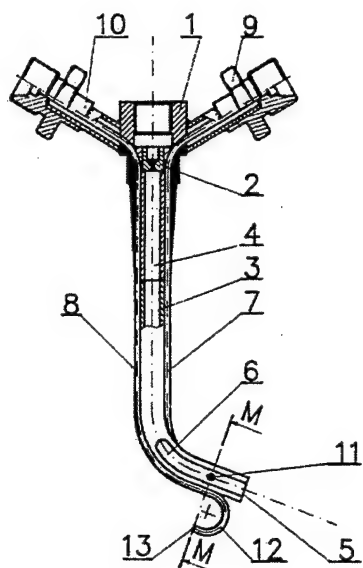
Test injector [11]. 1 - Body; 2 - Fuel nozzle; 3 - Fuel outlet pipe; 4 - Fuel channel; 5 - Injector outlet; 6 - Flat cut; 7 - Static pressure pipe; 8 - Total pressure pipe; 9 - Static pressure connector; 10 - Total pressure connector; 11 - Static pressure pipe inlet; 12 - Half-loop at the total pressure pipe; 13 - Total pressure pipe inlet.
